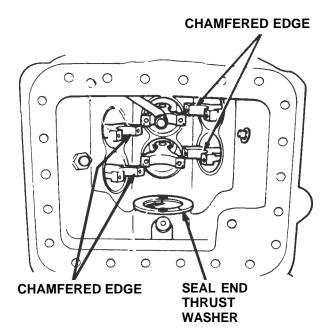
Installing Piston Rod Assemblies and Seal End Thrust Washer
